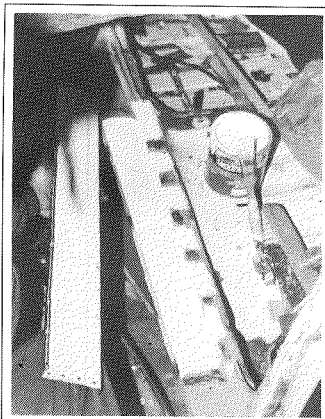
Give both inner surfaces a good coat of paint leaving the areas to be welded as clear shiny metal.
